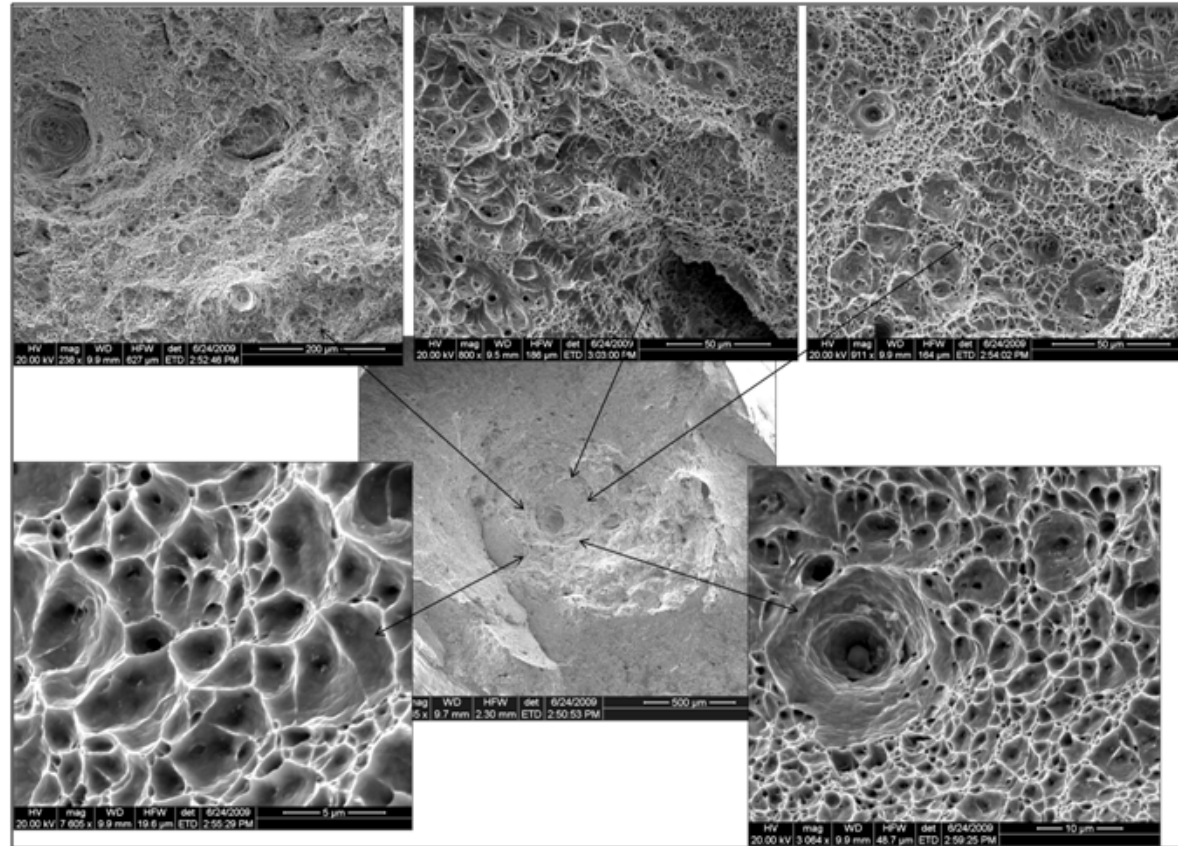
Fracture surfaces of the broken shallow notched bar sample 2B2-R.
